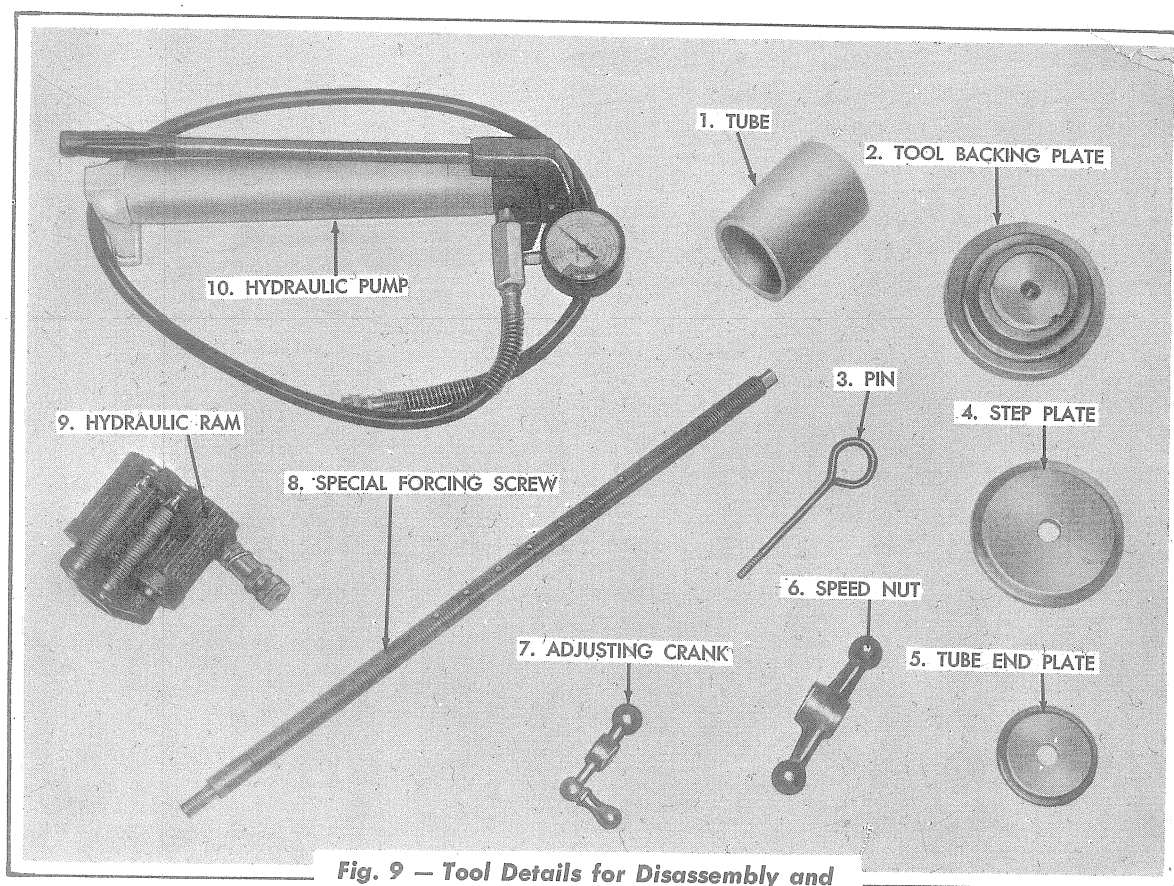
Tool Details for Disassembly and Assembly of Steering Clutch
